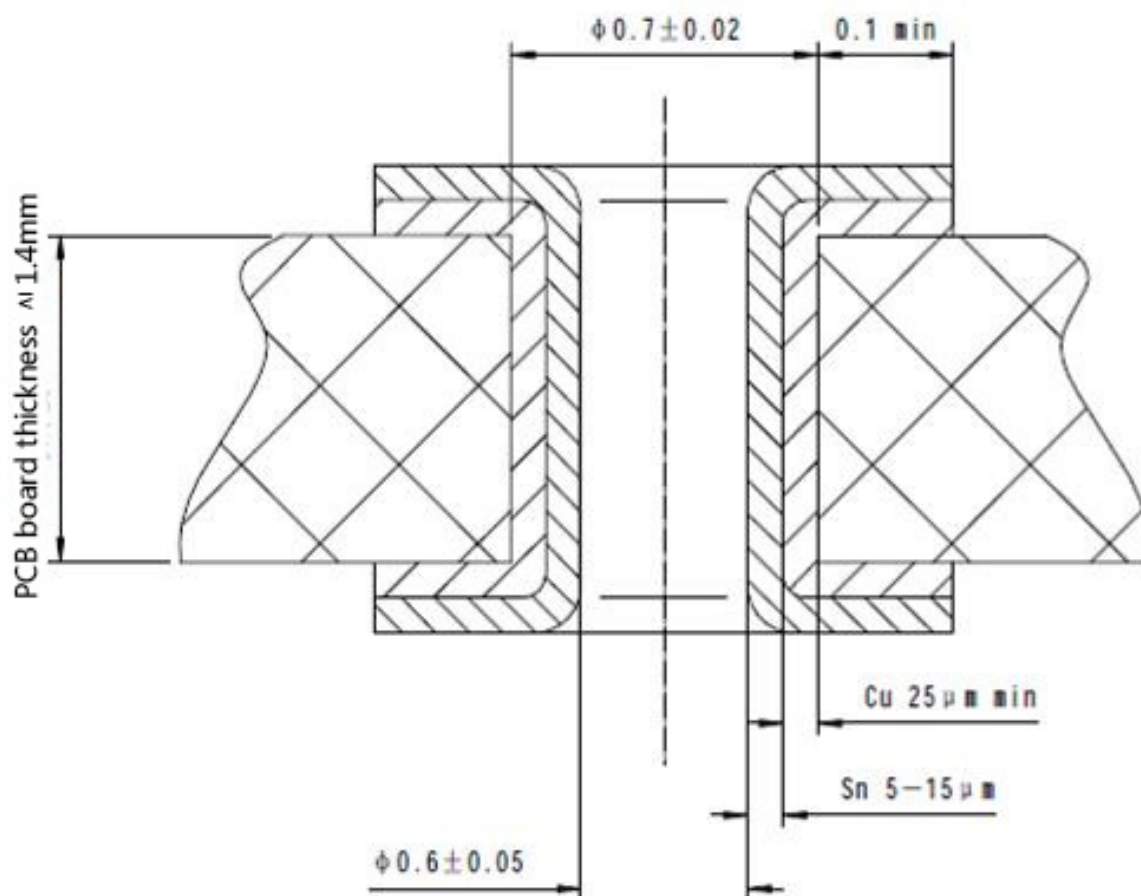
Schematic diagram of solder less area of PCB cut surface coating
